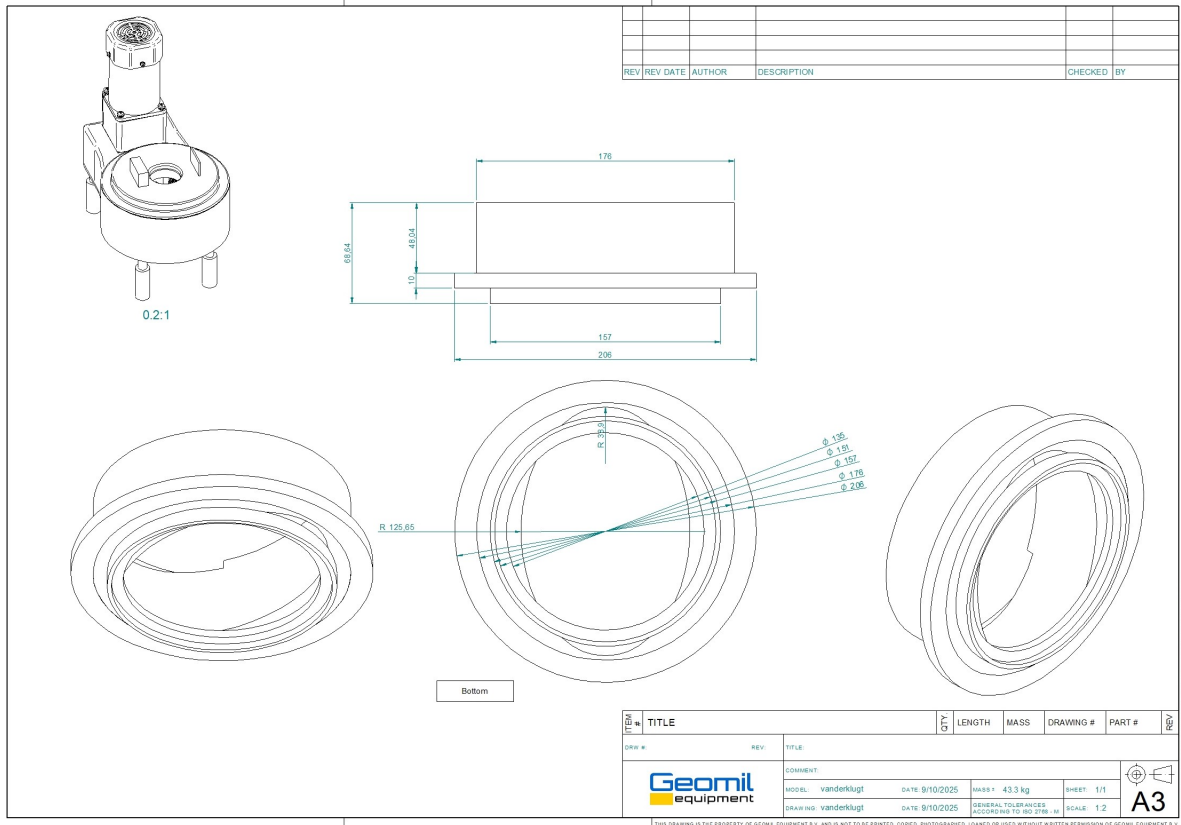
Technical Drawing Of The Ellipse Of The Raptor.
